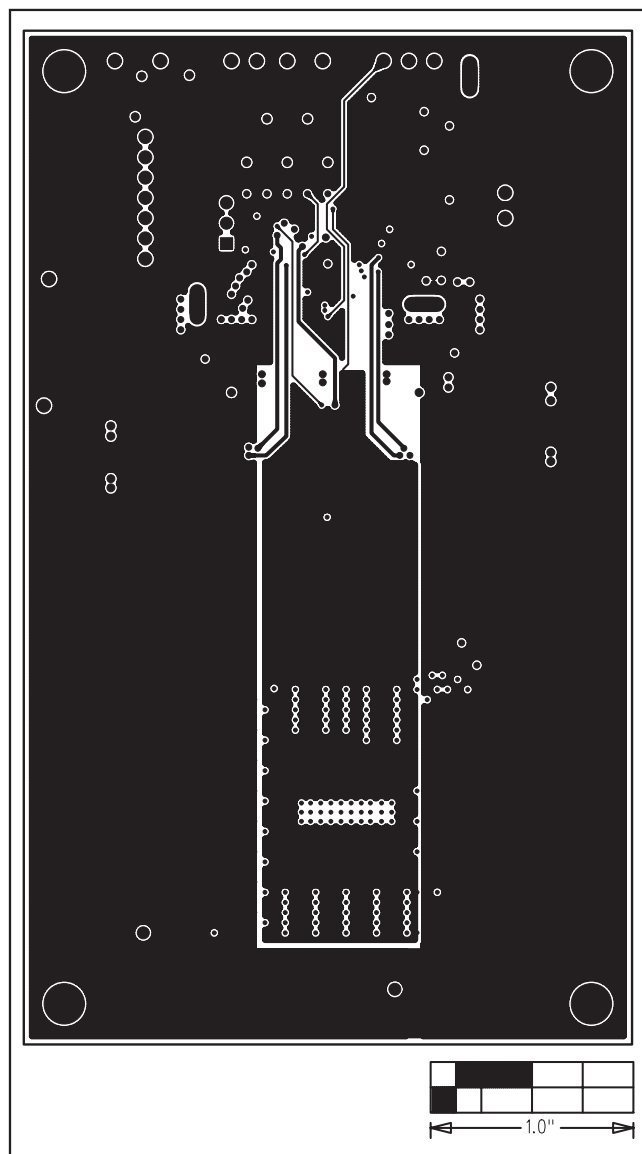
MAX17021 EV Kit PCB Layout—Internal Layer 6 (Signal Layer)
